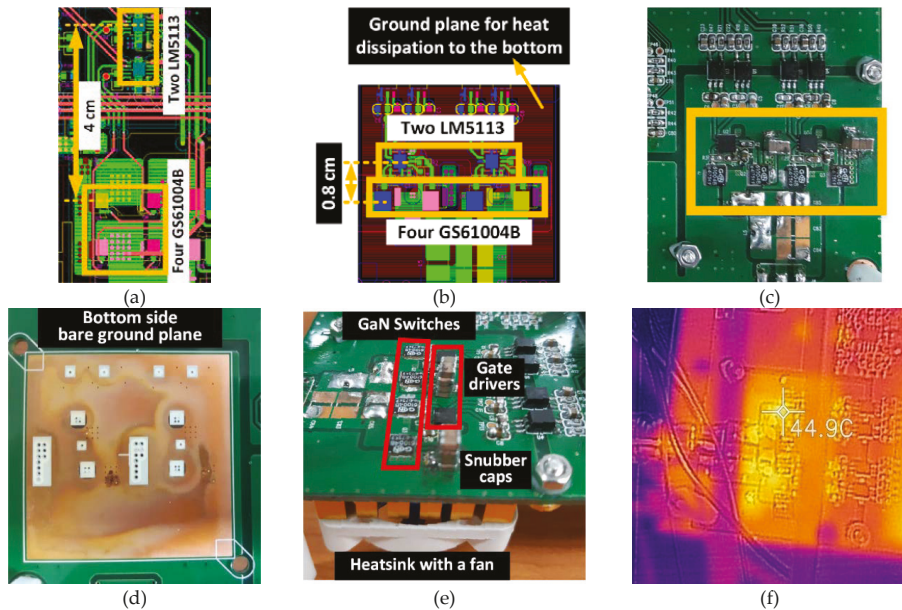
Configuration of the WPT system: (a) Initial design; (b) Revised design; (c) Fabricated inverter; (d) Bottom side ground plane; (e) Assembled heatsink and a fan; (f) Thermal image of the inverter at 81-W output.
